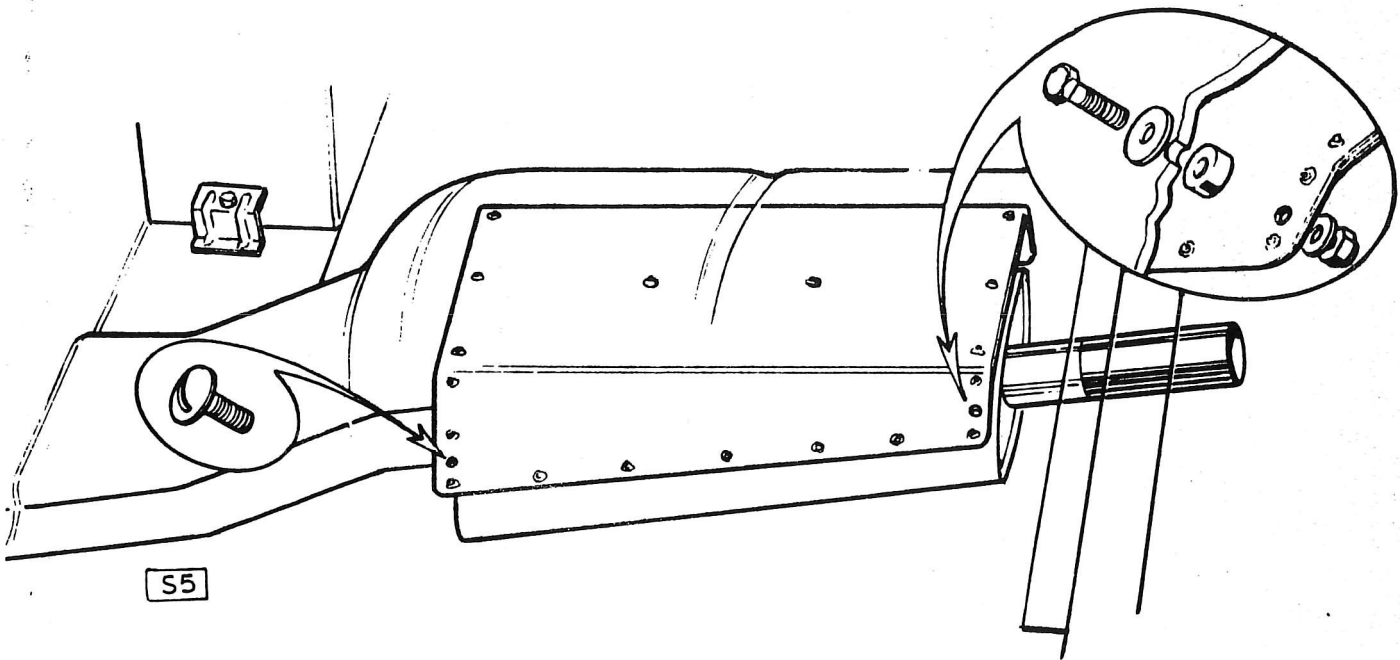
VIEW OF LONGITUDINAL SHIELD THROUGH FLOOR
